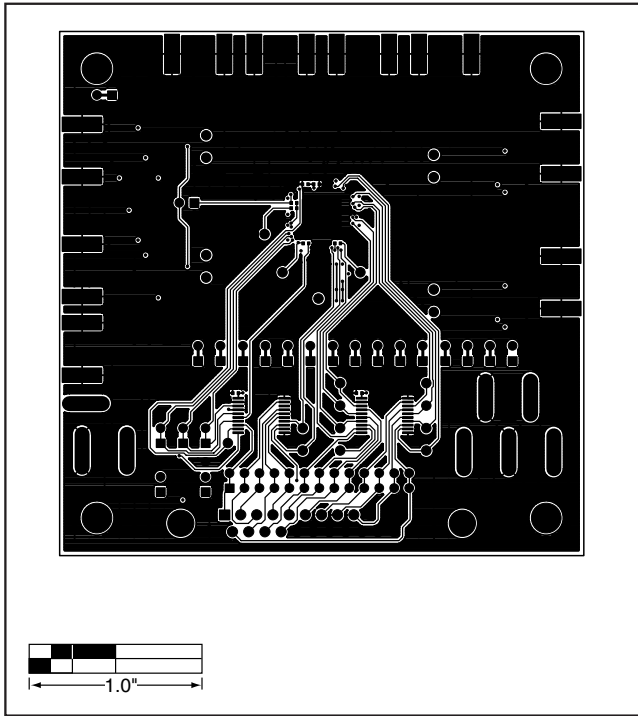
MAX2828/MAX2829 EV Kit PC Board Layout—Solder Side
